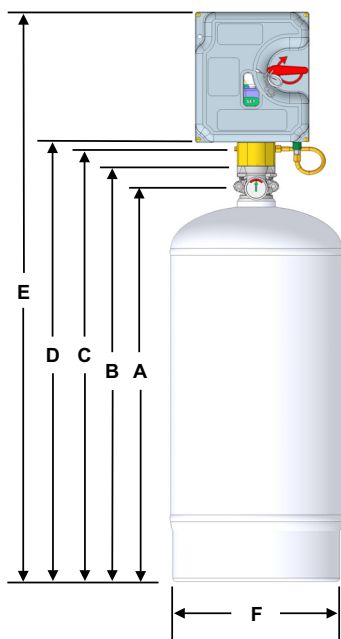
Dimensions of Cylinder Assembly with SVA and XV Control System
